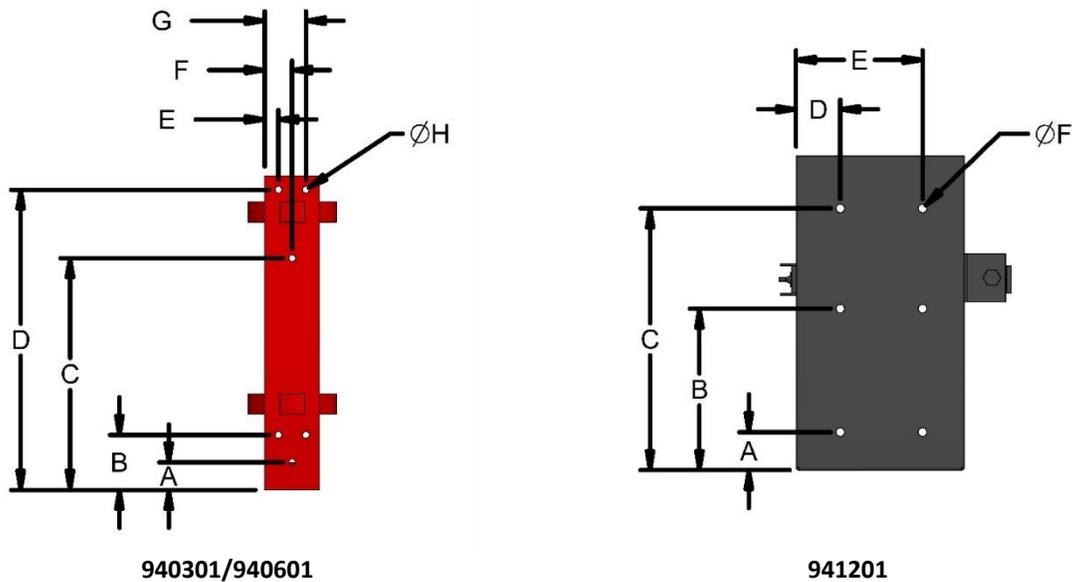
Cylinder Mounting Bracket Bolt Pattern
